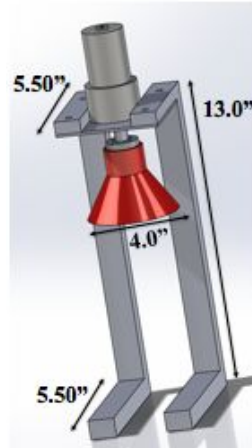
Friction Hold Container Opener drawn using SolidWorks
